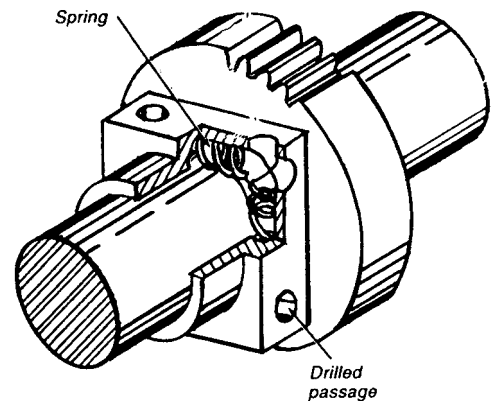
Springs inside the block grip the shaft because they are distorted when the gear is mounted to the box on the shaft.
